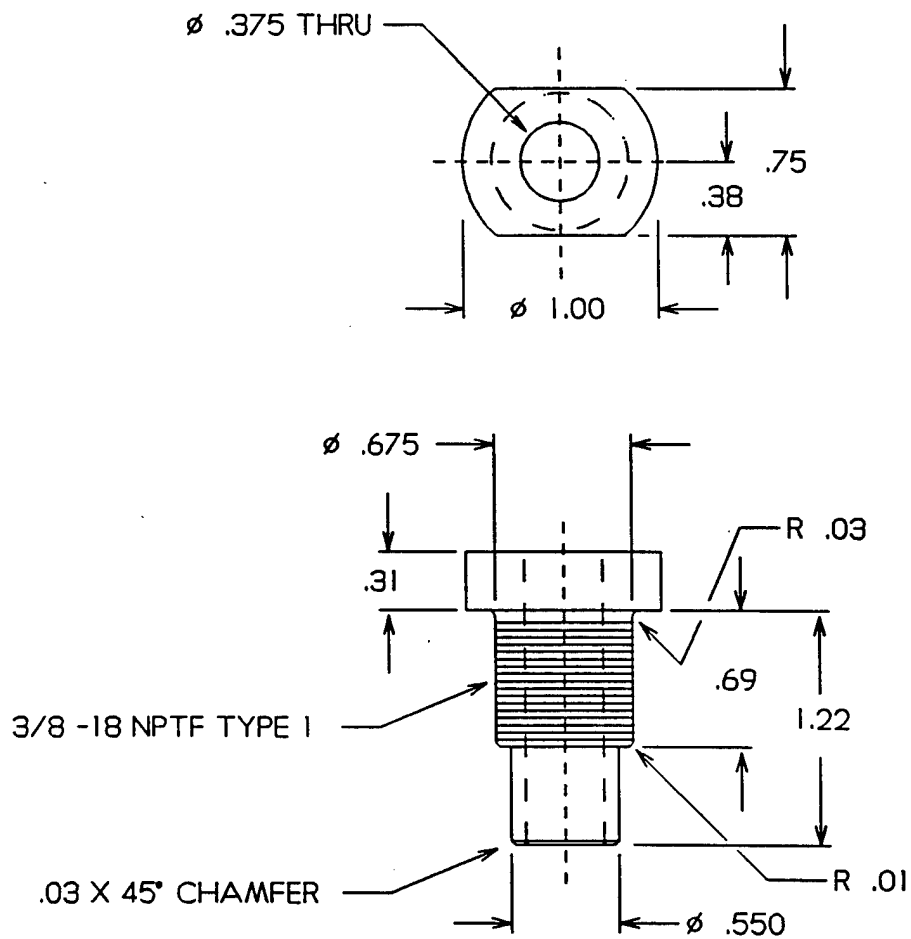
Engineering Drawing for Shock Tube Feedthrough.
